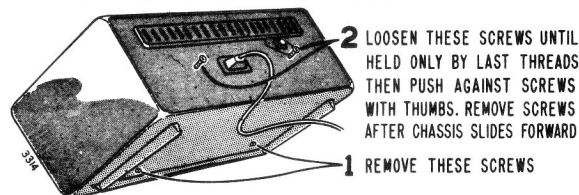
Rear View of Cabinet Showing Chassis Mounting Screws.
